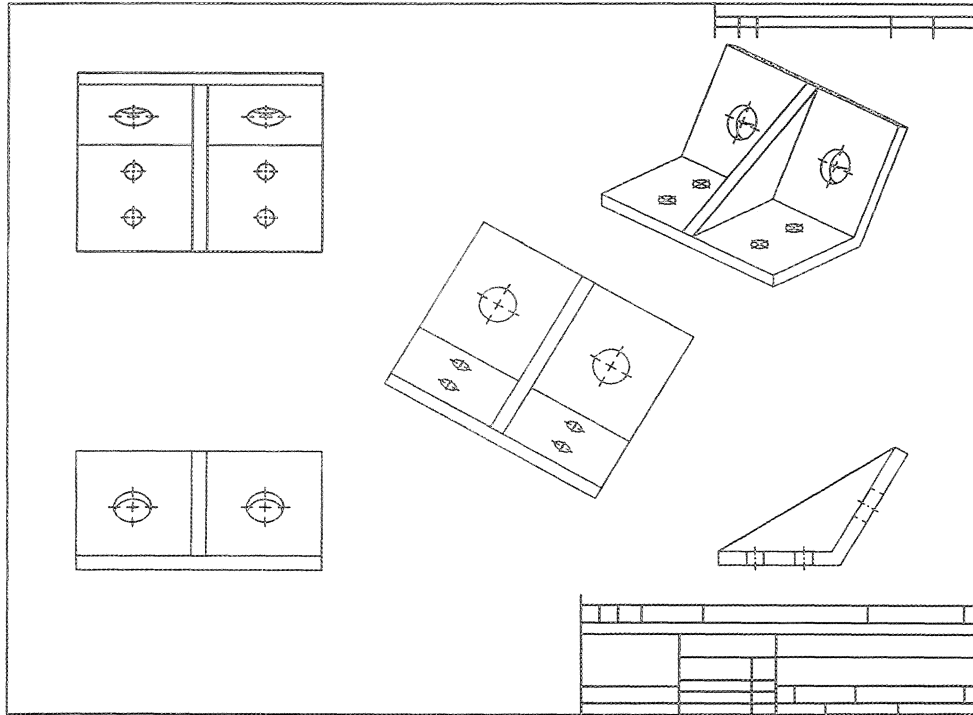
Angle Bracket Modeled on AutoCAD Using Solids and Displayed on a Drawing Format with Top, Front, Right Side, Auxiliary, and Pictorial Views
